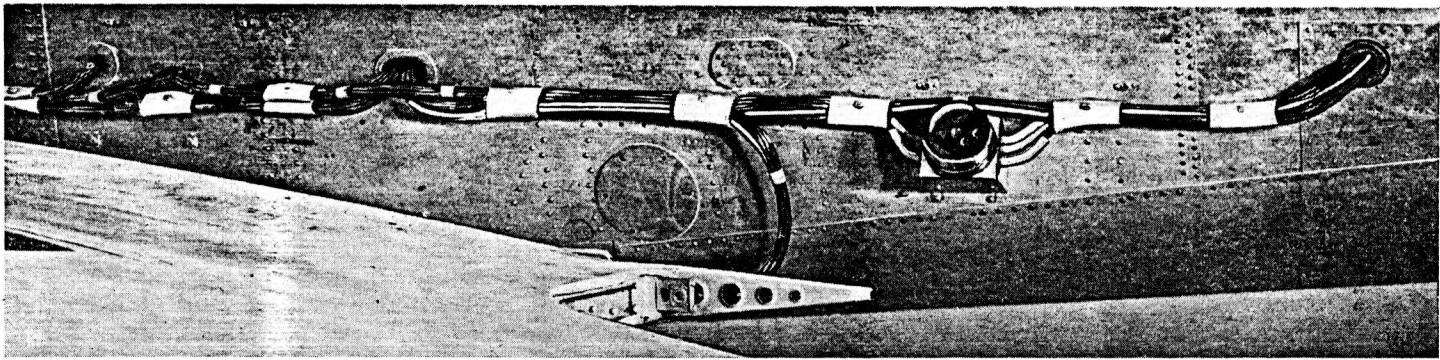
Wiring on outside of structure, showing superimposed loom
